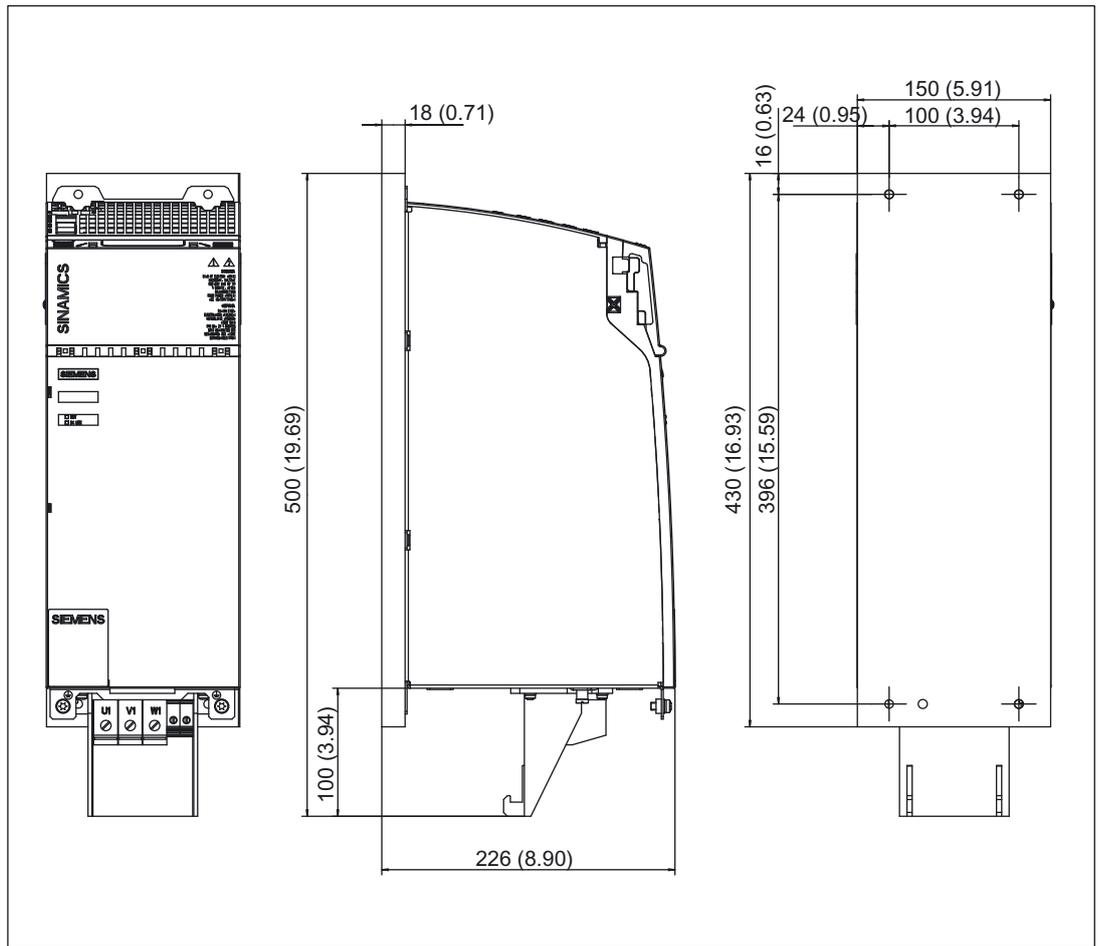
Dimension drawing: Basic Line Module with cold plate 40 kW
